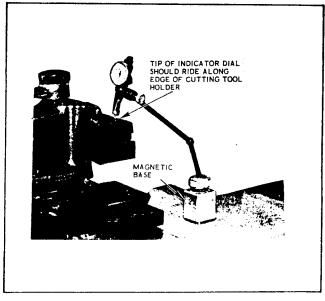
Indicator Dial Installed on Lathe for Checking Template Rail Alignment
